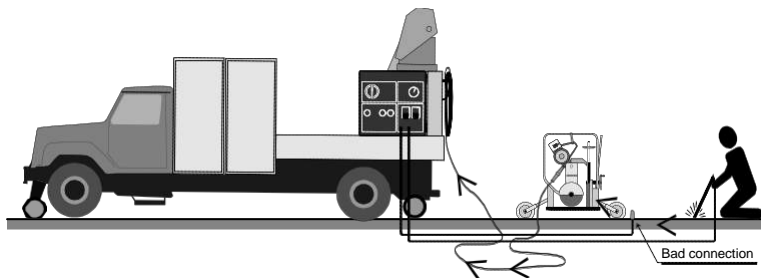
Welding Machine grounding return path accidentally passing through extension cable ground wire
